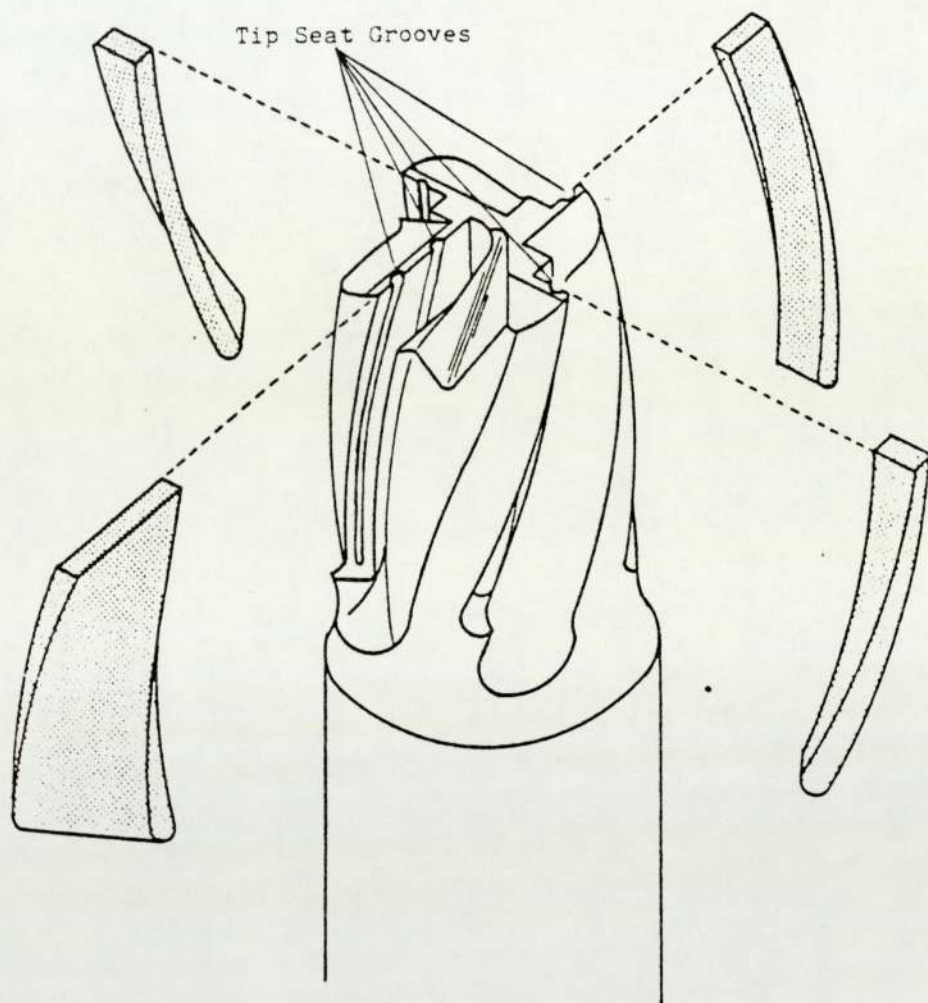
VIEW OF MILLING CUTTER SHOWING TIP SEAT GROOVES
